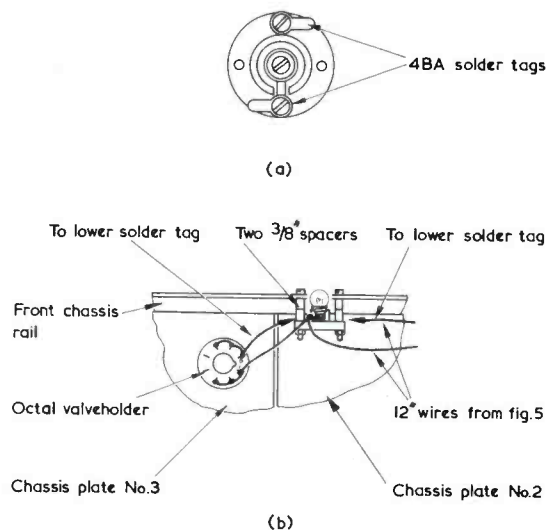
(a). The bulbholder has two 4BA solder tags fitted, as shown here
